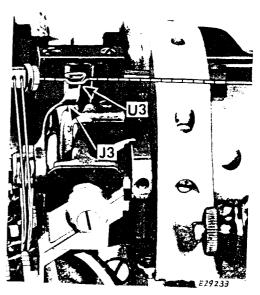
Needle Thread Controller in Correct Relation to Needle Thread
